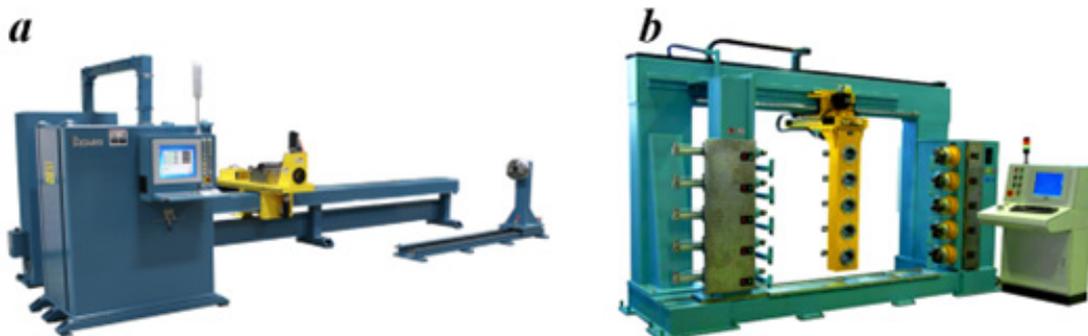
Goal post and bed machine type filament winding machine: (a) multi-axis filament winding machine; (b) MAW20 MS 4/5 winding machine (Source: <https://archive.mikrosam.com>).
